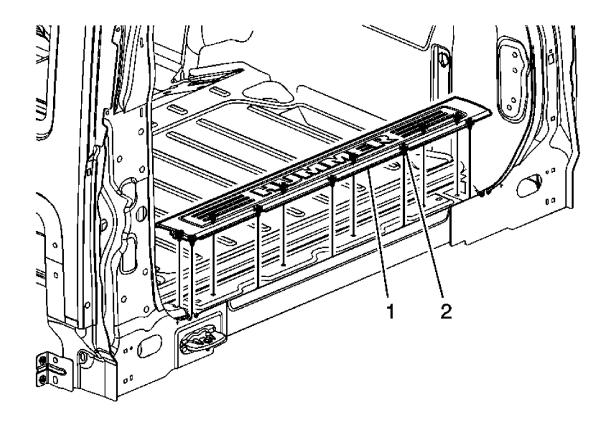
Liftgate Door Sill Plate Replacement Courtesy of GENERAL MOTORS CORP.
